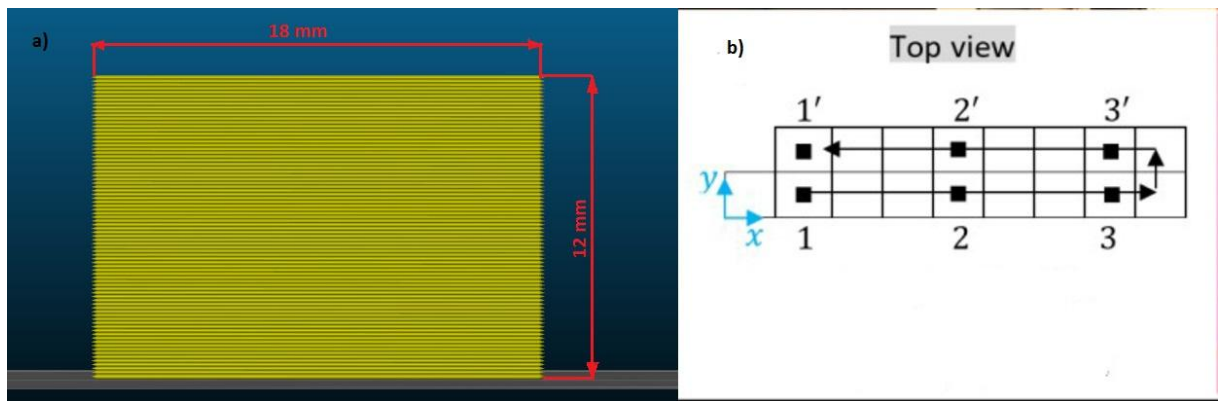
(a) the geometry of sample; (b) deposition sequence
